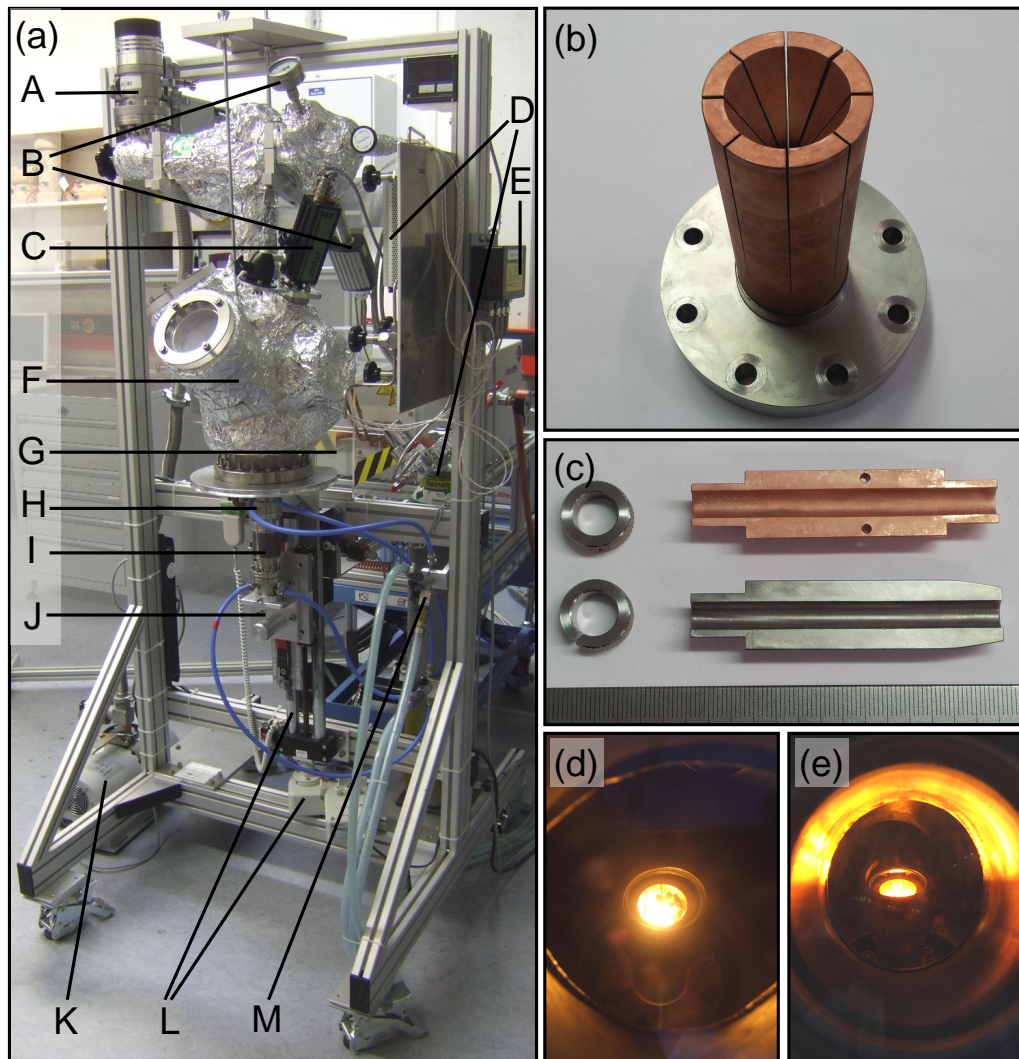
All-metal sealed rod casting furnace. (a) Complete system comprised of the following components: (A) turbo molecular pump, (B) pressure gauges, (C) pyrometer, (D) gas handling and purification system, (E) heating tape controller, (F) vacuum chamber, (G) radio-frequency oscillator circuit, (H) central support flange, (I) highly flexible metal bellow, (J) pulling rod on top of a manually movable sled, (K) roughing pump, (L) linear actuator for sample mounting, (M) cooling water supply. (b) Hukin type cold crucible hard-soldered onto a CF DN63 steel flange. (c) One half of a copper and a steel casting mold with clamping rings. The scale is in millimeter. (d) Left viewing port. (e) Front viewing port.
